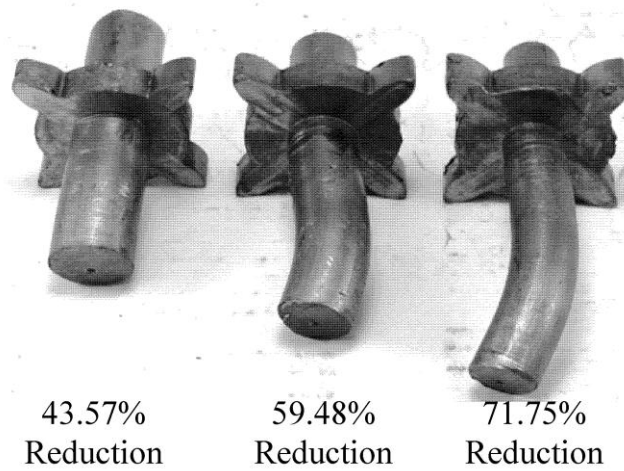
Extruded forward-backward extrusion-forging 4-tooth gear head shaped product
